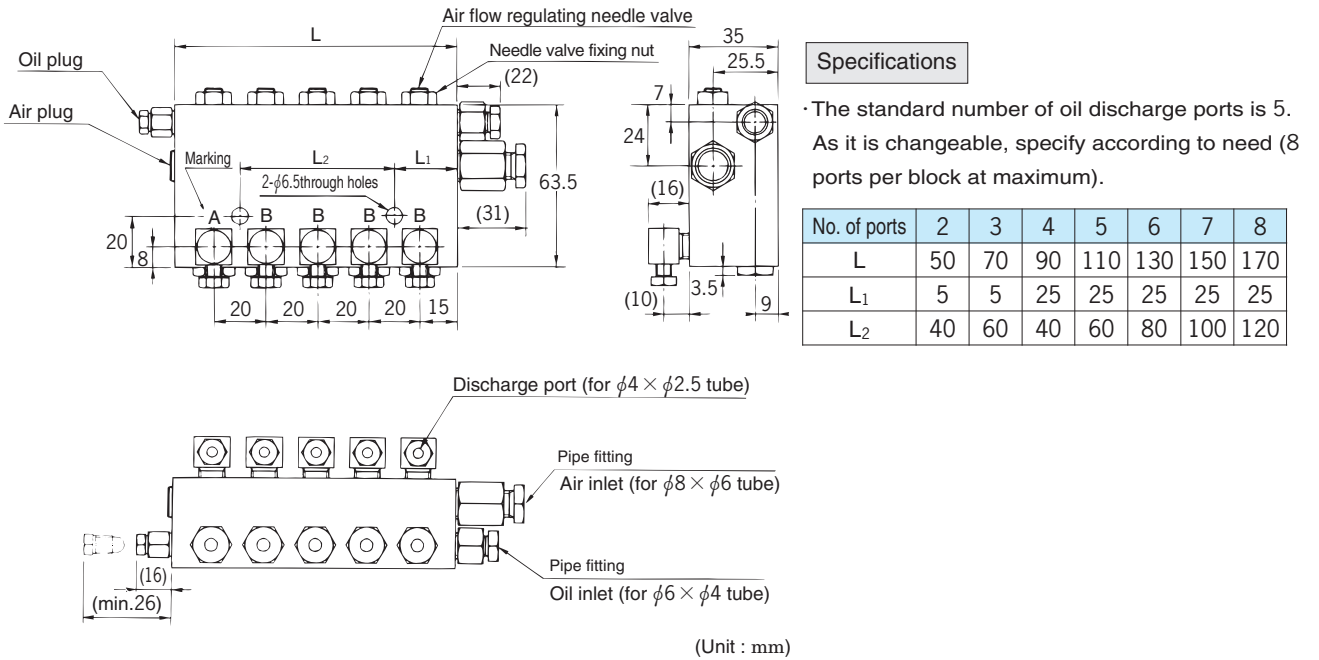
4 Outline drawing of KOYO mixing valve (example of 1A4B-1)
